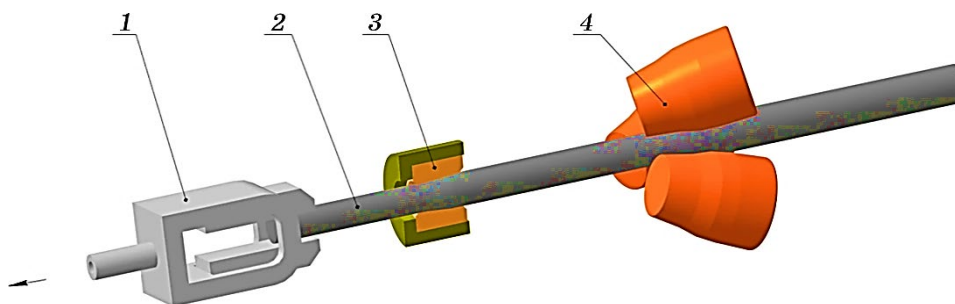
Schematic diagram of new bar straining process: 1—gripping device; 2—bar; 3—drawing rolls; 4—broaching rolls.
